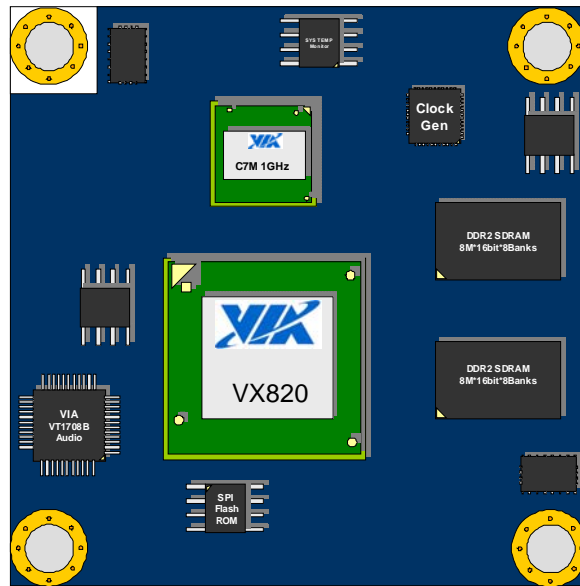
Mobile-ITX CPU Module Reference Design PCB Reference Design Layout - Bottom side
